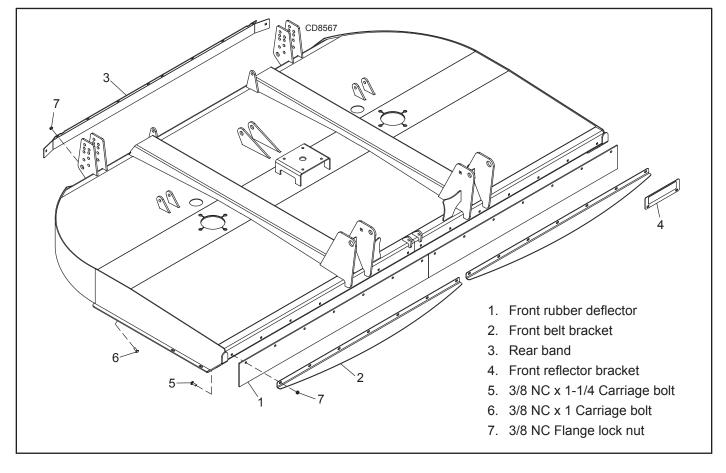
DS8.30 & DS10.40 Rubber Shield Installation
